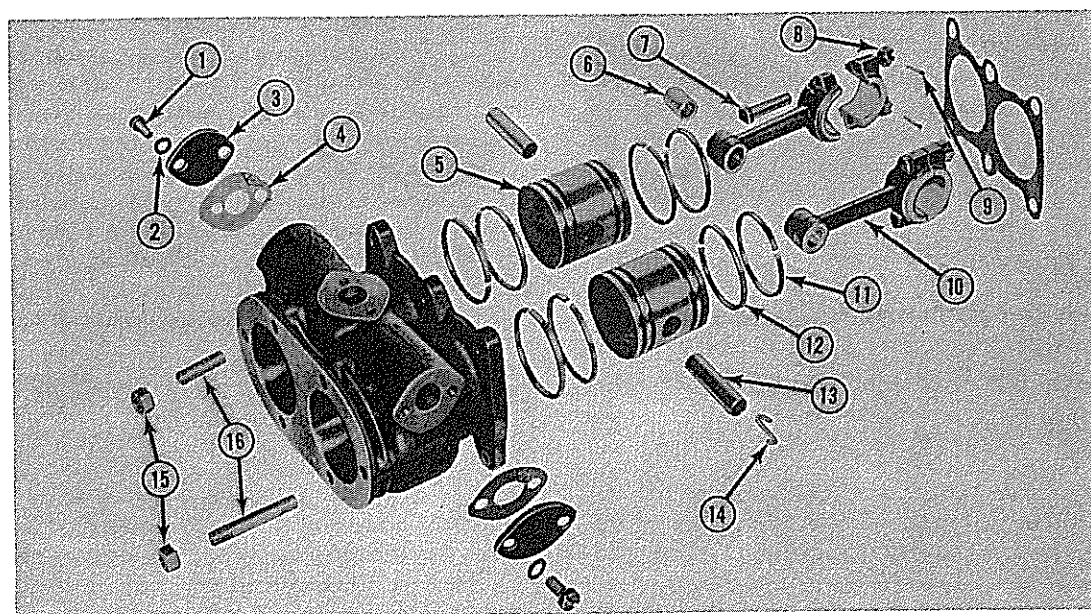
CYLINDER BLOCK, EXPLODED
